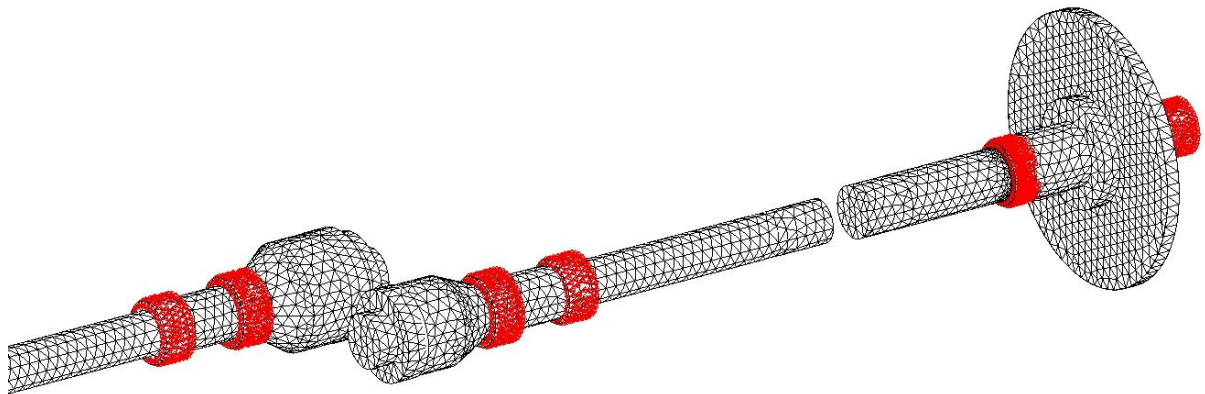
Constraining the gearbox shafts and the generator shaft.
